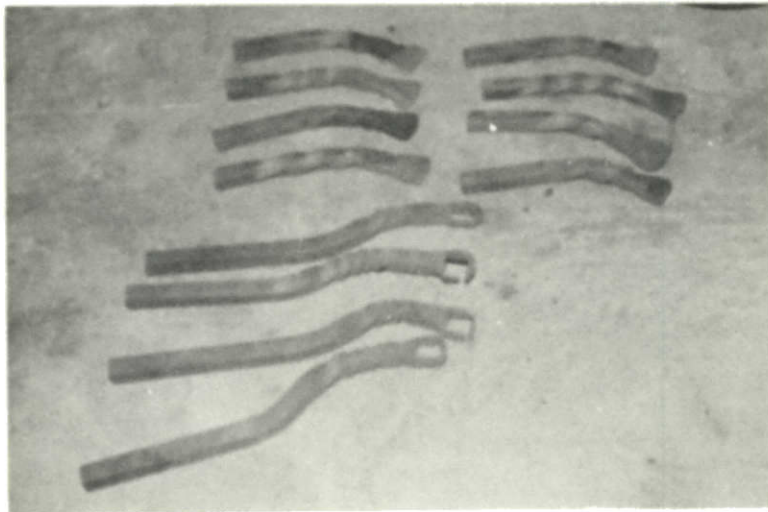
Smaller rods forged, punched, drifted and welded into position
